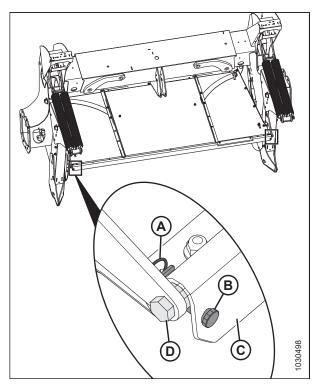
Forming Shield Secured to Front of Windrower Legs
